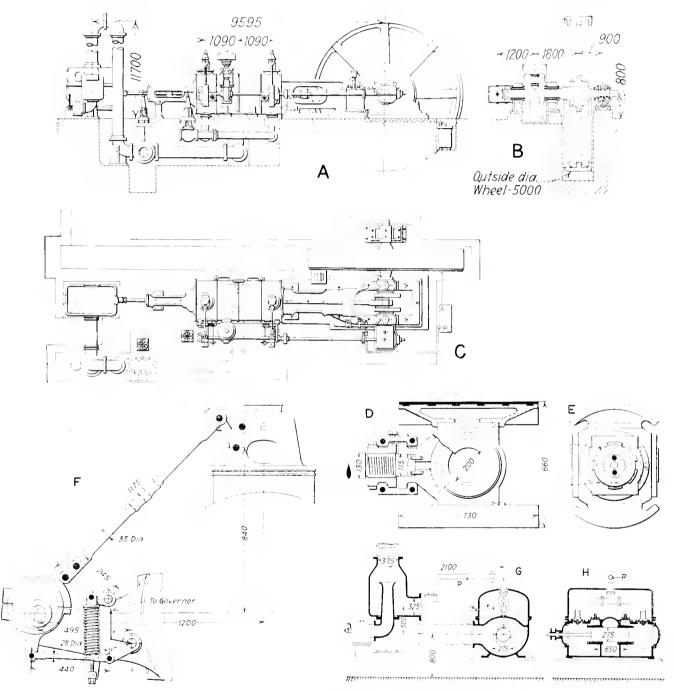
STRAIGHT FLOW STEAM ENGINE FOR ROLLING MILL DRIVE
